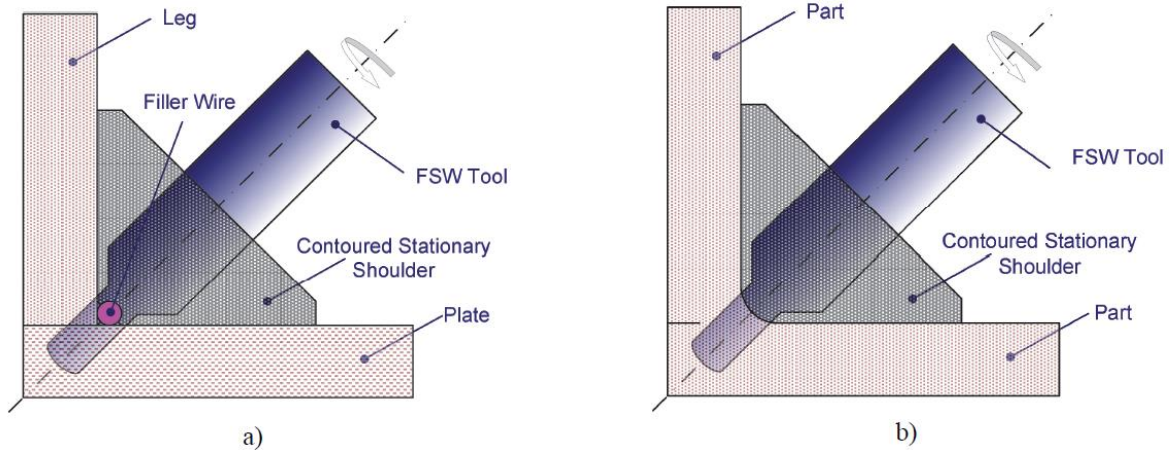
Schematic of Corner AdStir Fillet SSFSW: a) Before welding and b) After welding (Martin, 2013).
